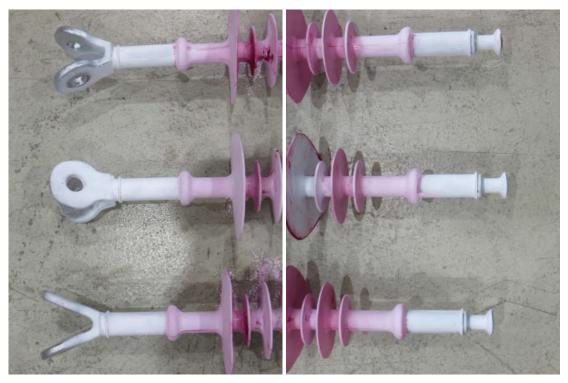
Assembled core load-time test, test samples No. 9, 10 and 11 after dye penetration test
